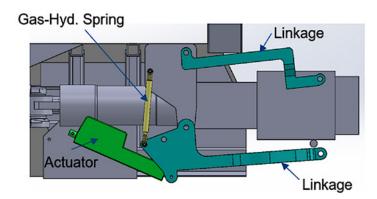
Prototype Linkage Profile with the Enclosure Removed from View* (*side view*)
